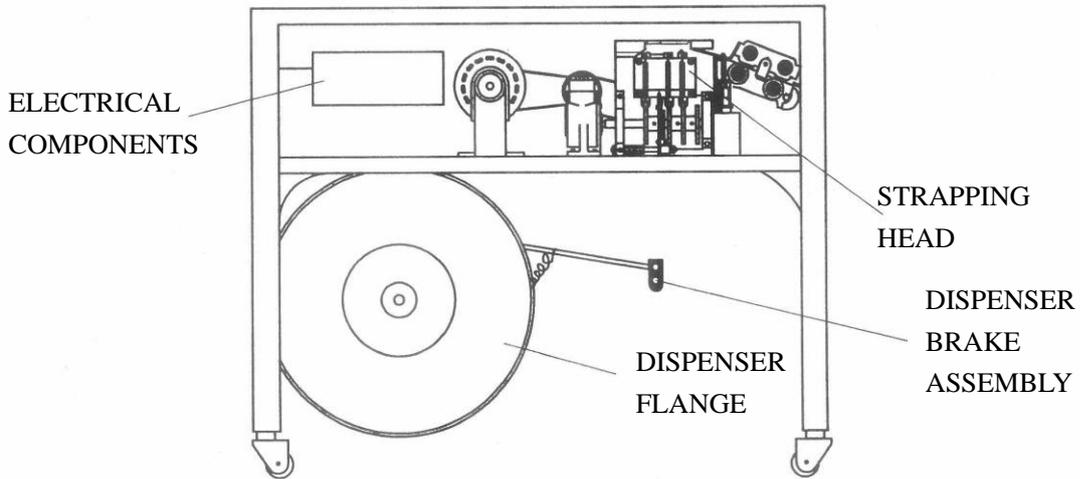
MAJOR COMPONENTS, FRONT VIEW
